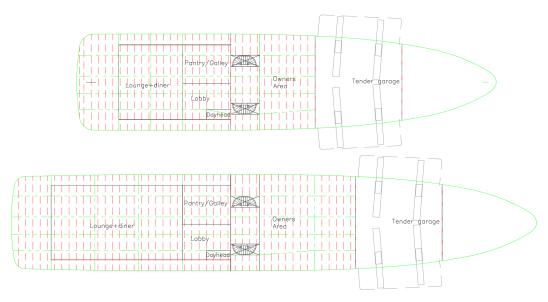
The construction overview of the bridge deck for the minimum and maximum length, in green the primary stiffeners and in red the secondary.
